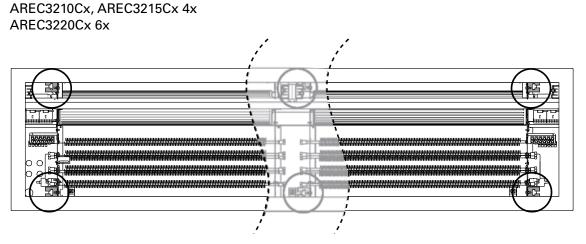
Location of the mounting brackets on the inside of the unit.
